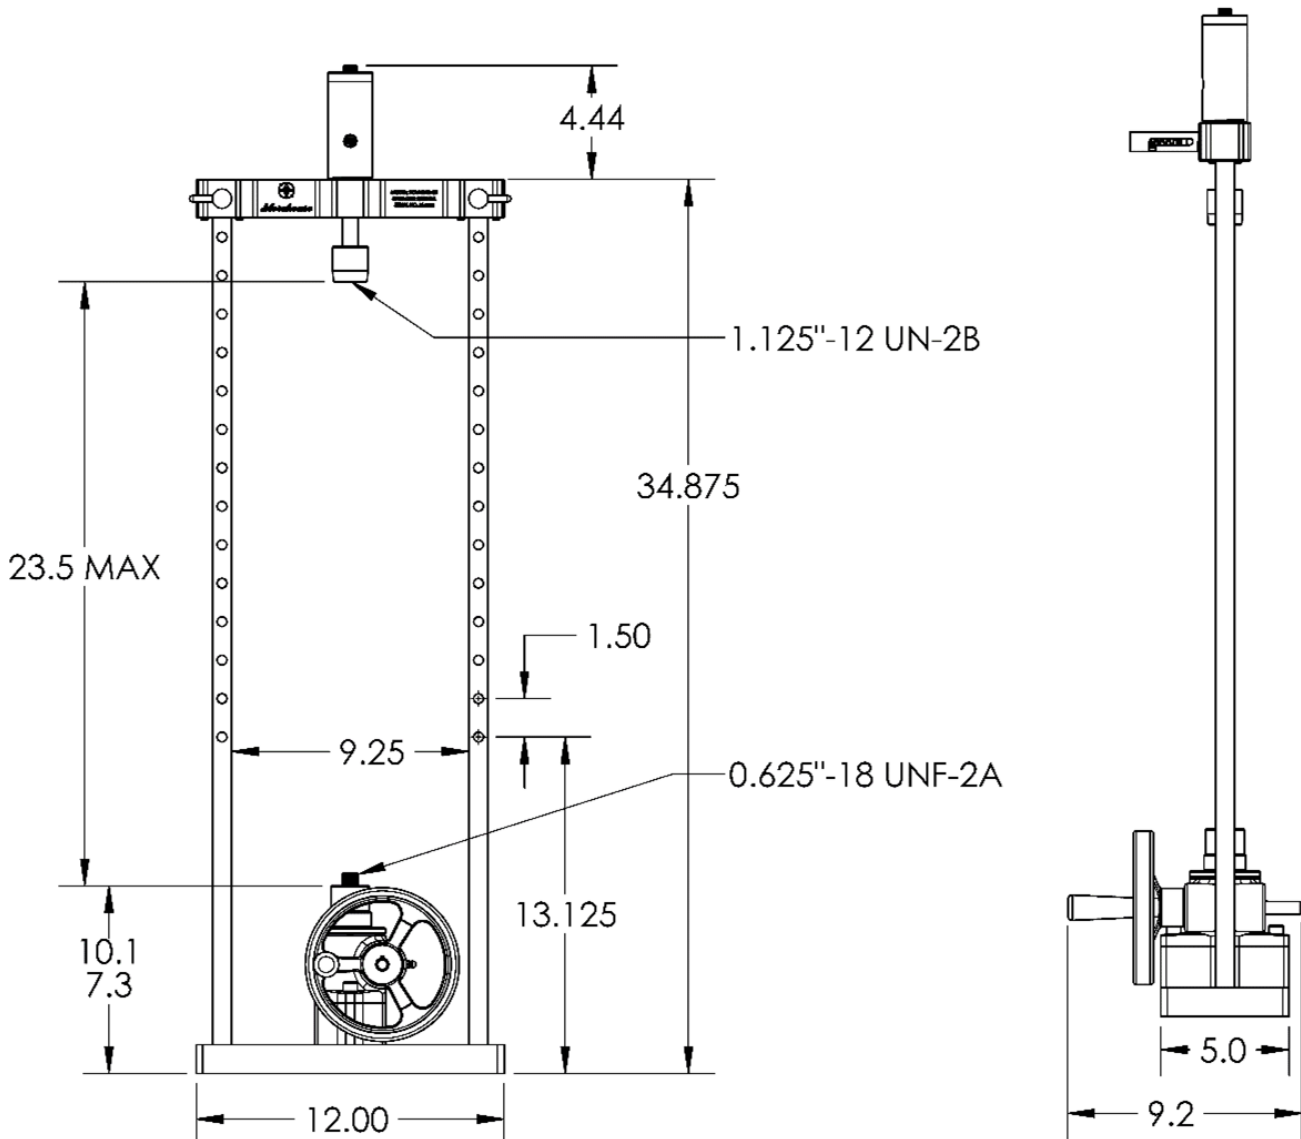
Dimensions of Portable Calibrating Machine (Model: PCM-2MD-02)
